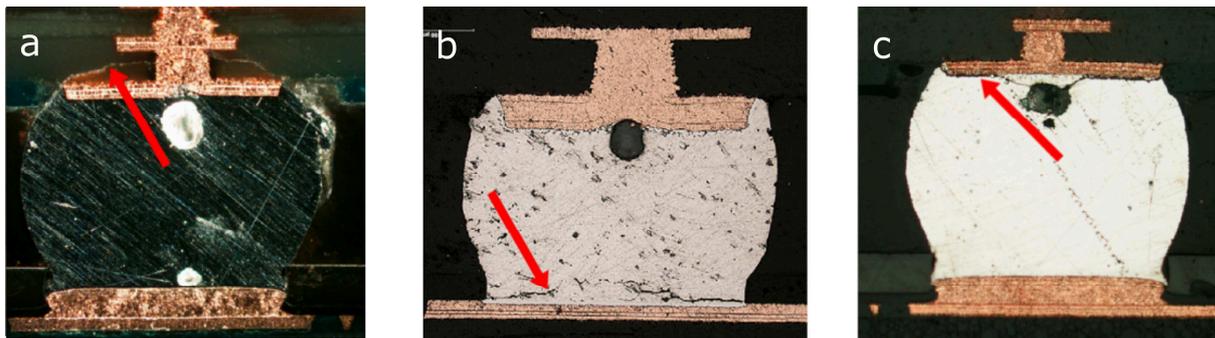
Typical failure patterns of PCB during a BLDT or BLCBT: a) Failure in the outermost epoxy layer, b) Failure in the solder bump, close to the component, c) Failure at the interface between solder bump and copper pad.
